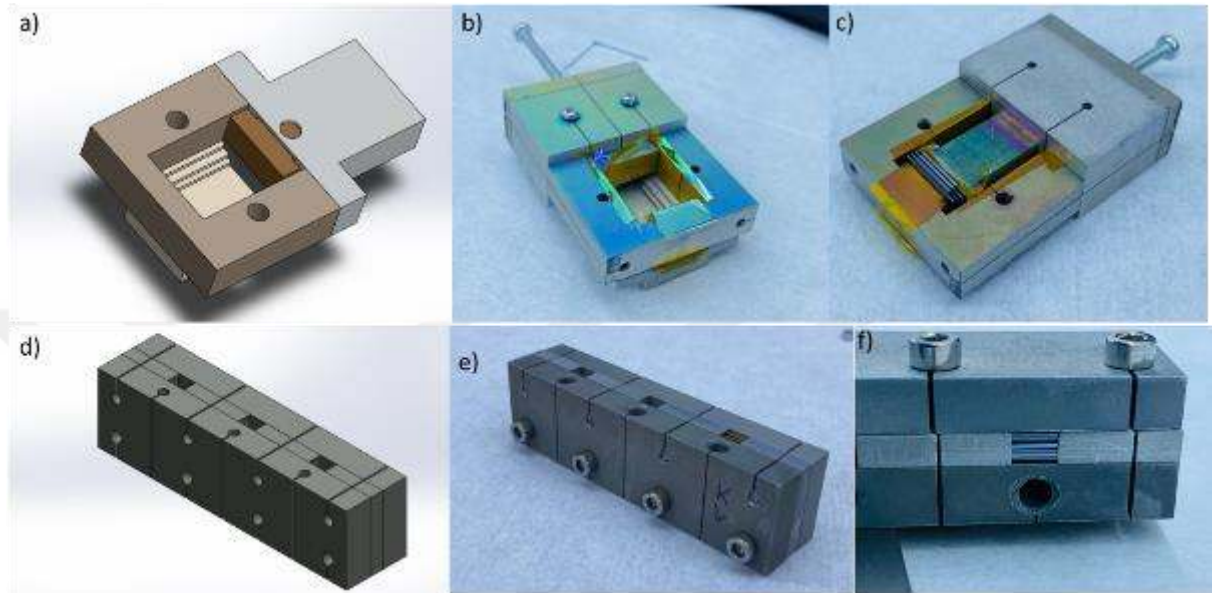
a) Schematic view of Design-1 of mirror coating adaptor b,c) The images after manufactured and laser places on Design-1 adaptor d) Schematic view of Design-2 of mirror coating adaptor e,f) The images after manufactured and laser places on Design-2 adaptor
